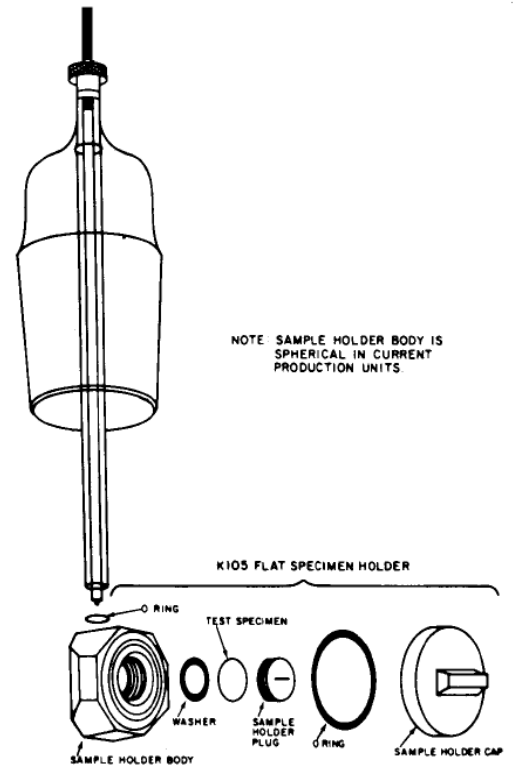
Exploded View of K0105 Flat Specimen Holder.
